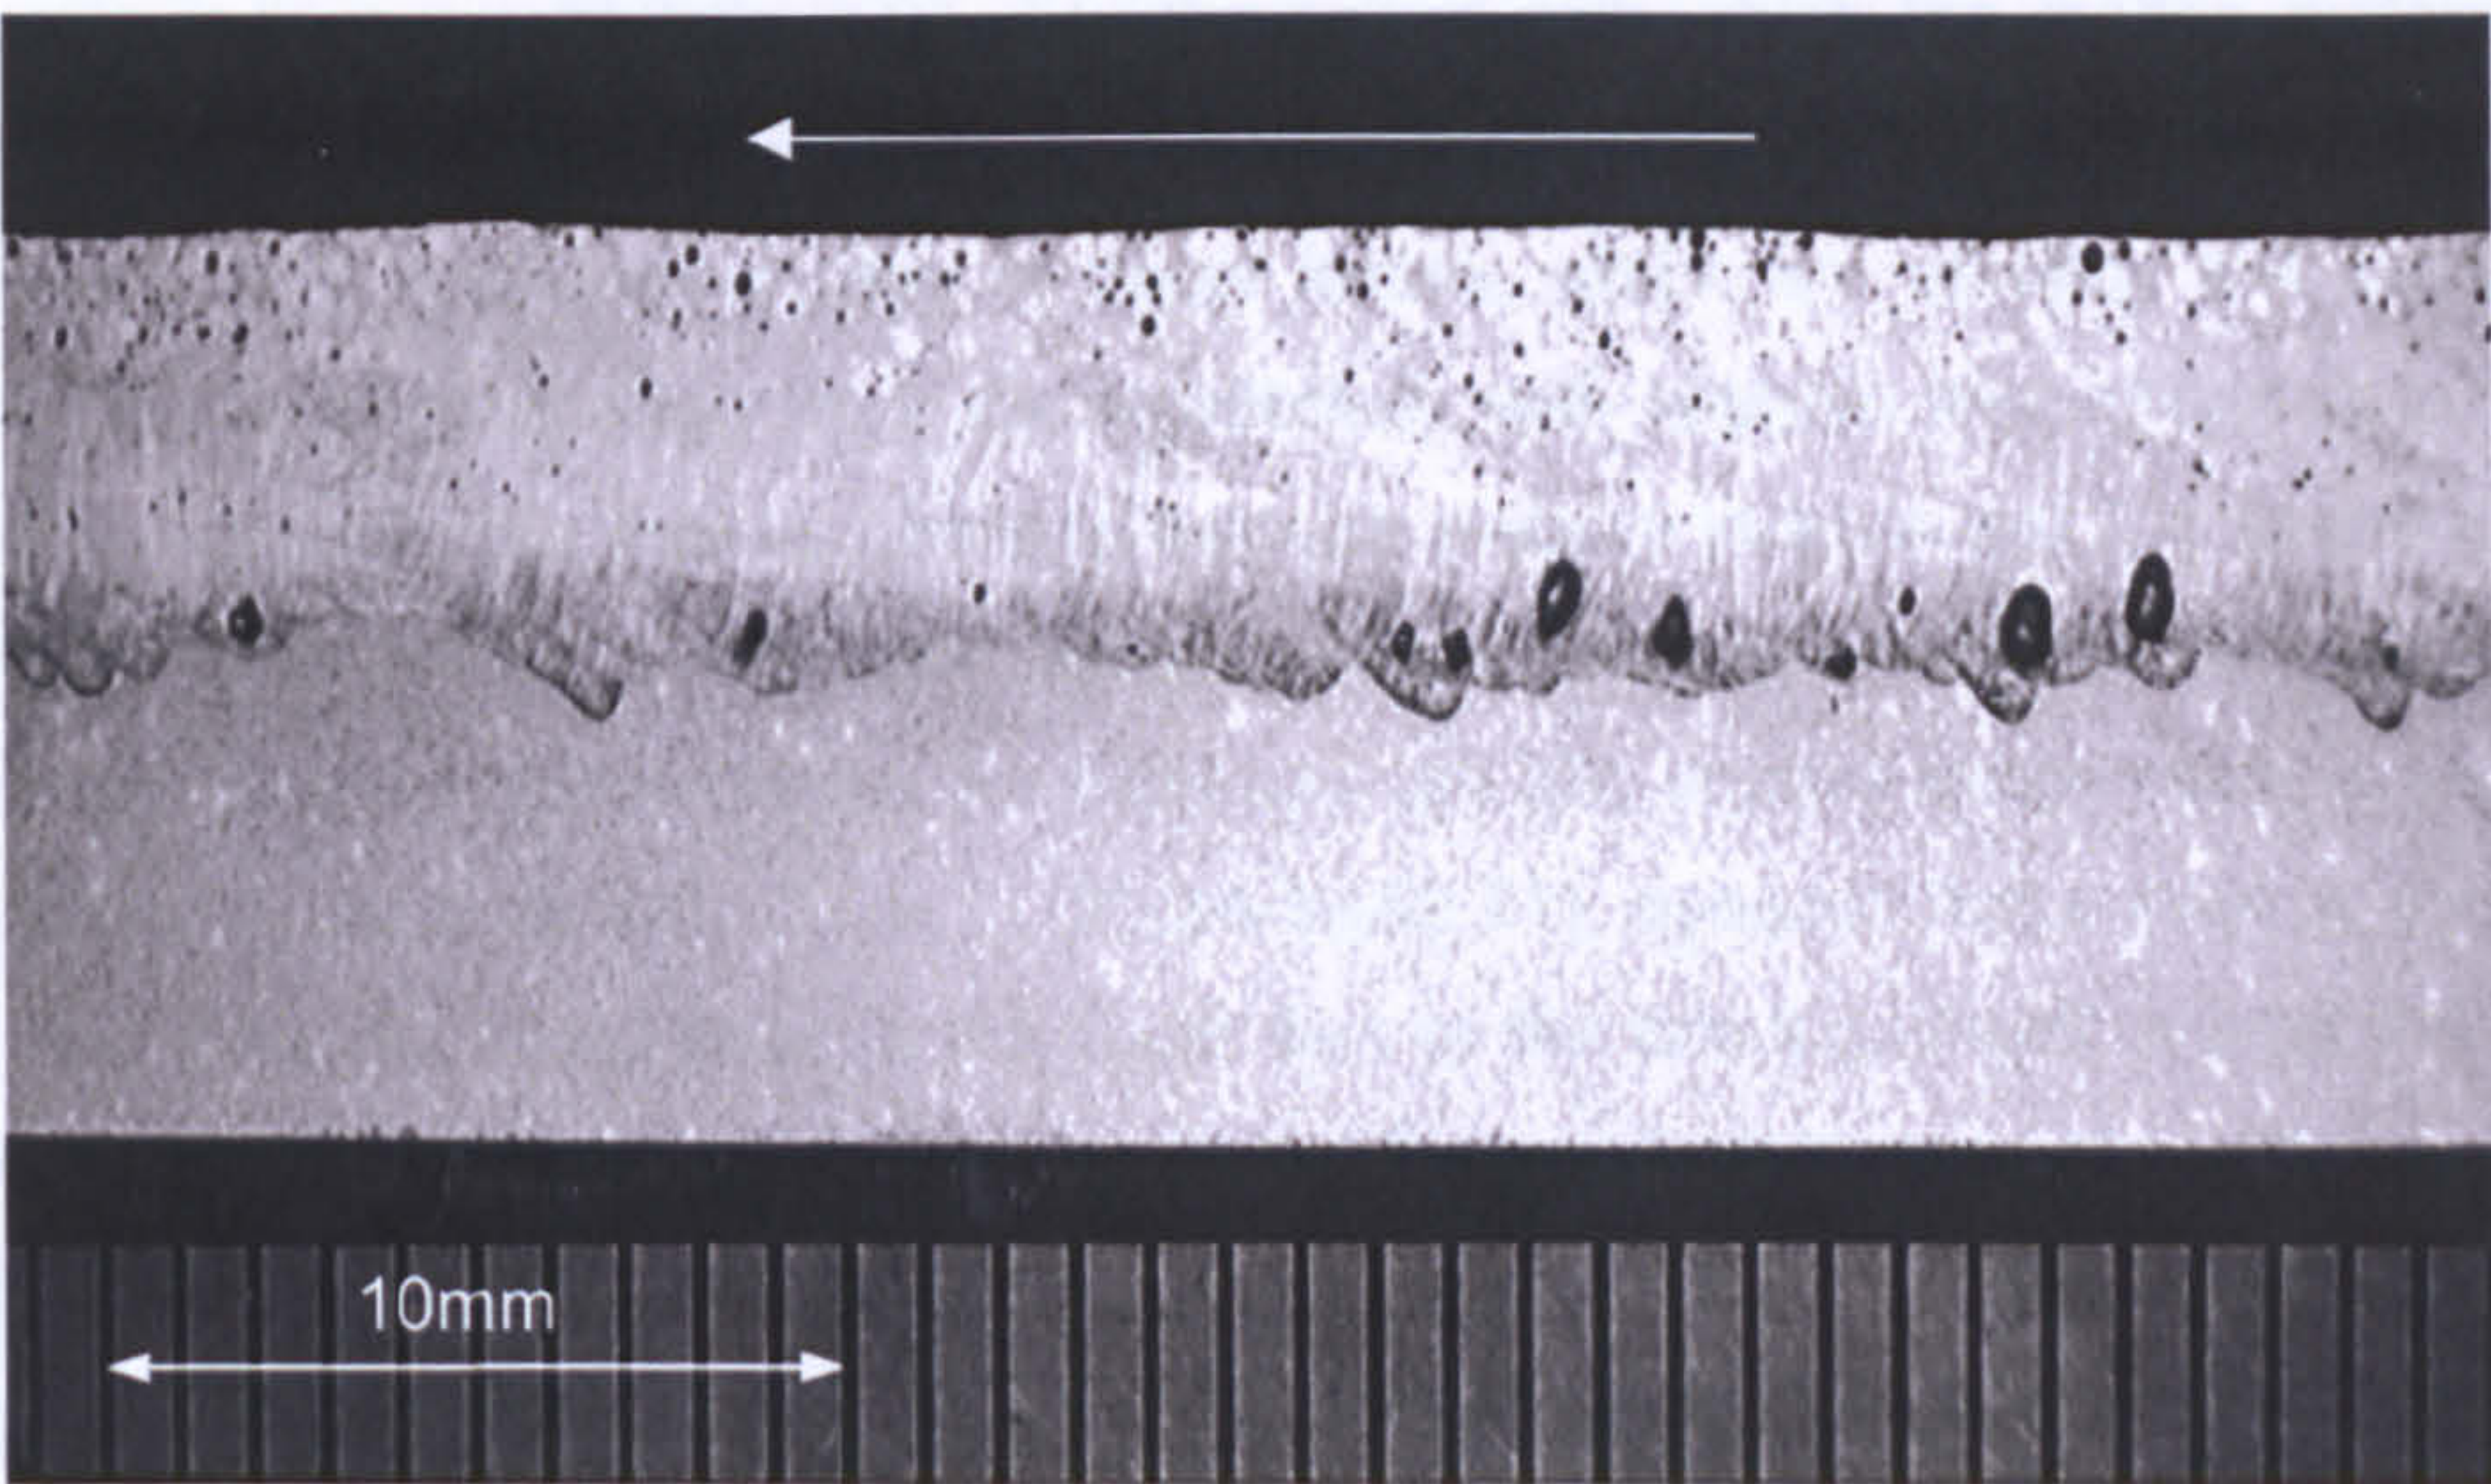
Longitudinal cross-section of a 3.5kW laser weld produced in 12.7mm thickness aluminium at a welding speed of 1m/min
